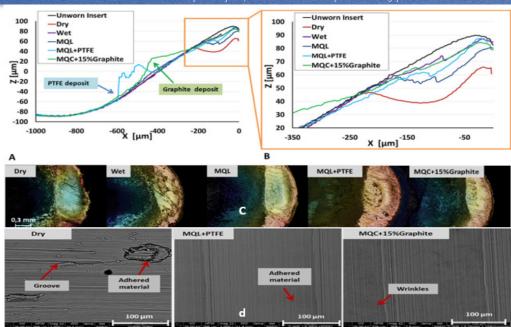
Cutting tool rake faces under the various machining conditions: (A) overall 2D profiles, (B) the zone of the damaged cutting edge, (C) 3D tool images, and (d) surface defects detected on samples machined, dry, SL—assisted MQL, and SL—assisted MQC. Source [83]
